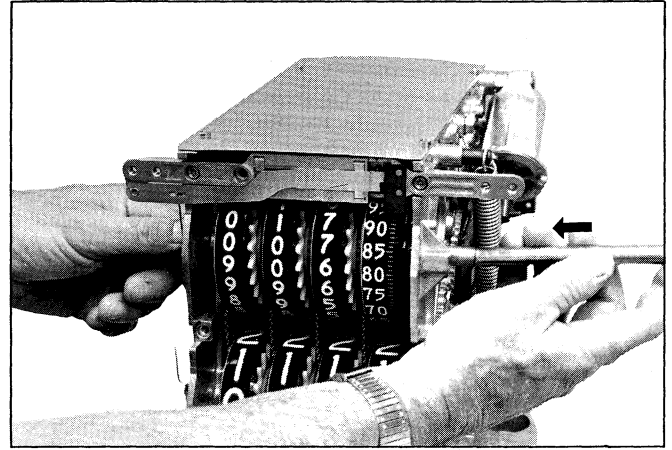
Inserting short dummy shaft into open end of long dummy shaft.
